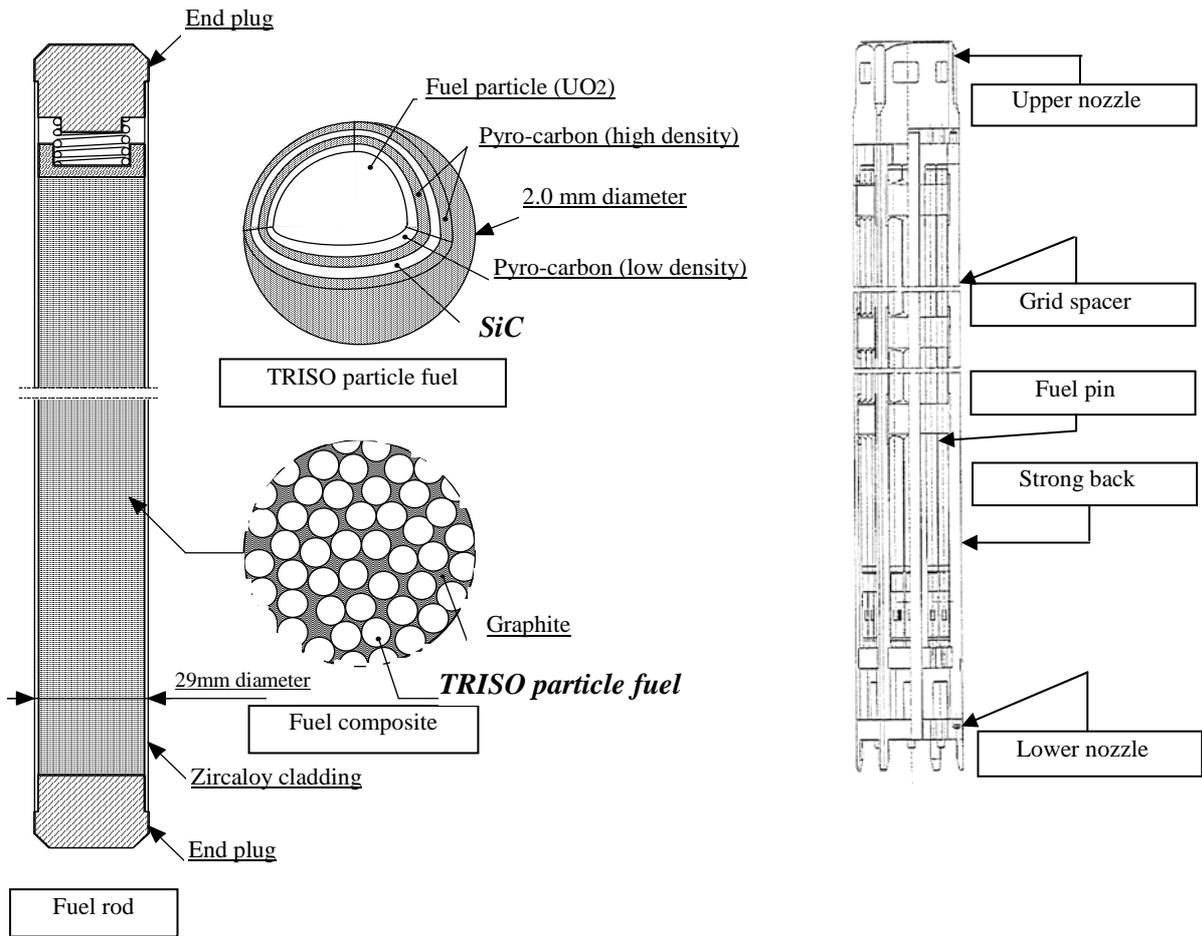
PFPWR50 fuel and fuel assembly design.
